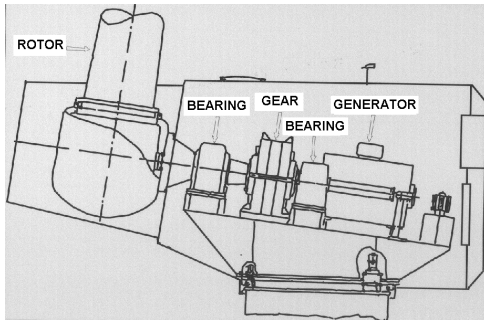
Transmission system consisting of hub, two main bearings, main shaft and gear, and with the generator marked out.
